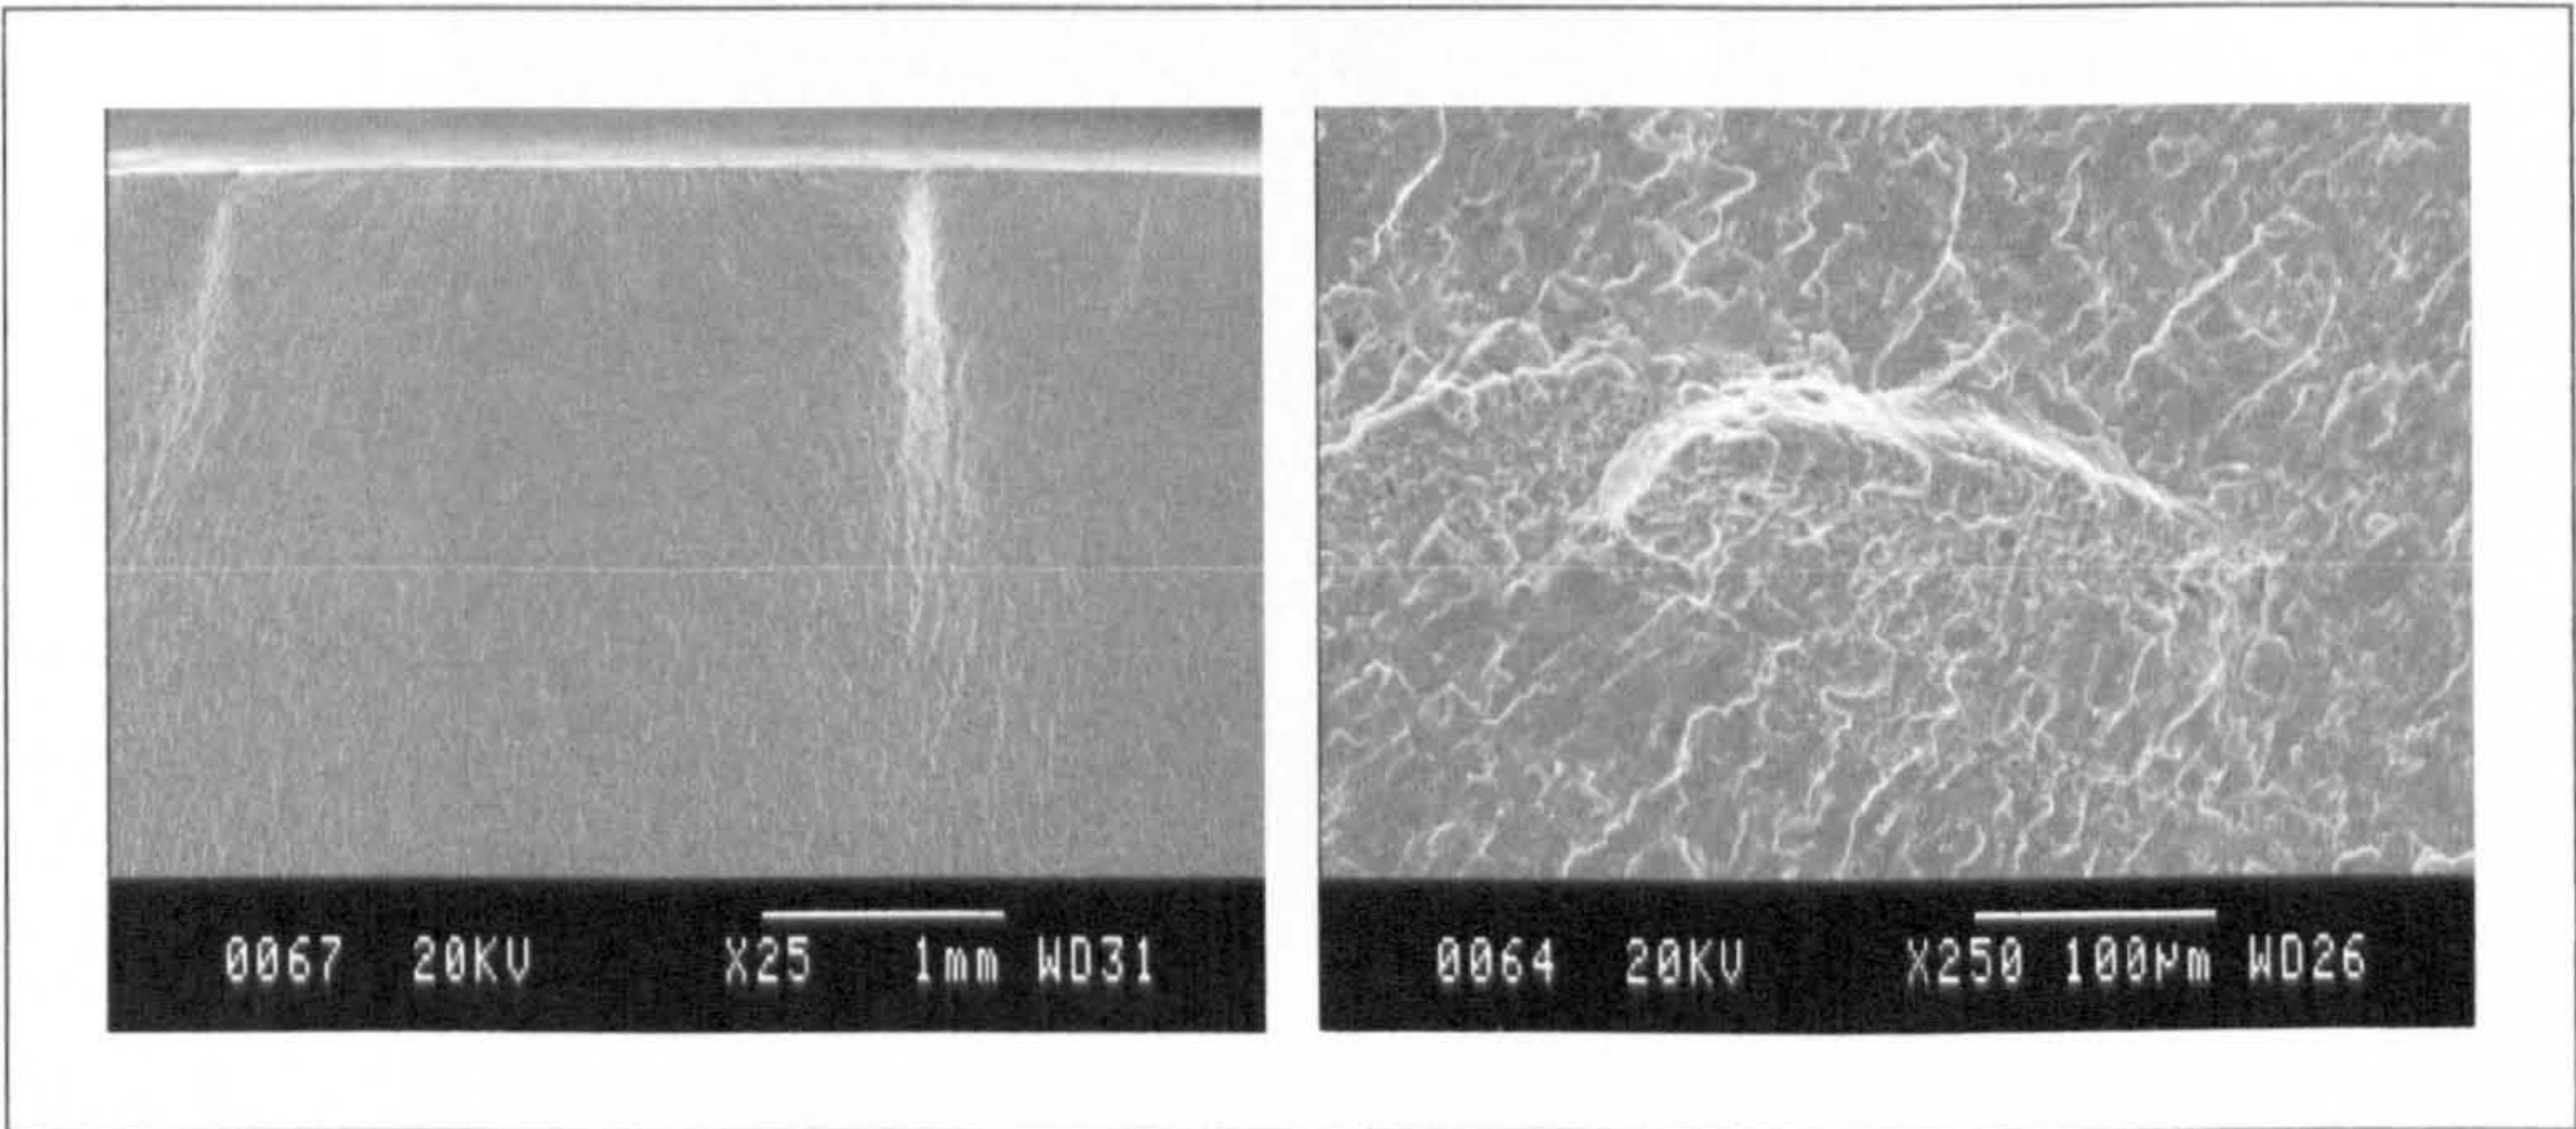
Line initiation (left), PFD on fatigue fracture surface (right), (FS SP 4).
